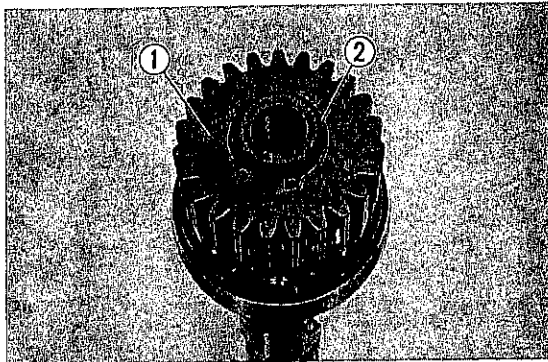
① Primary drive gear ② 20 mm snap ring
